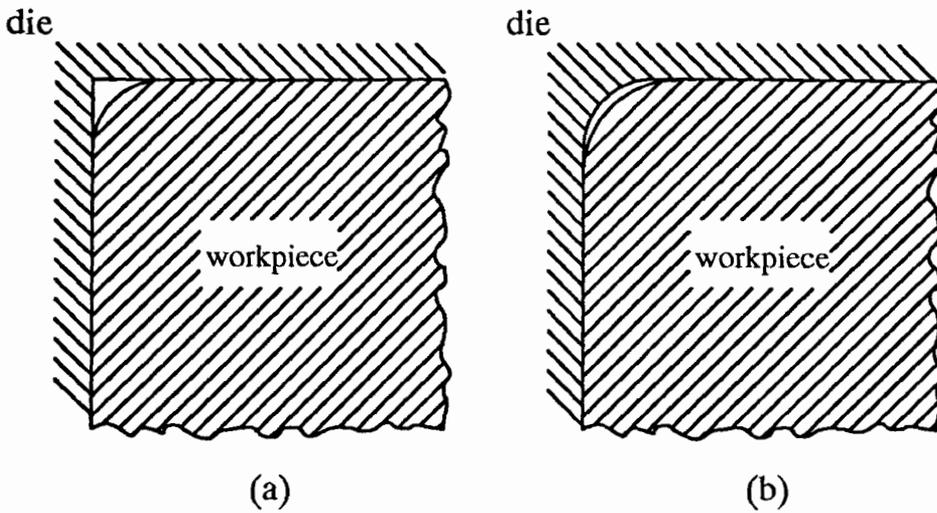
Illustration of workpiece corner geometry in two different dies
